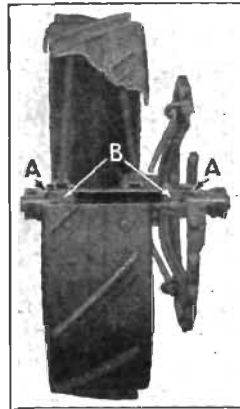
Main wheel showing roller bearings at B, and ball-thrust bearings at A.
